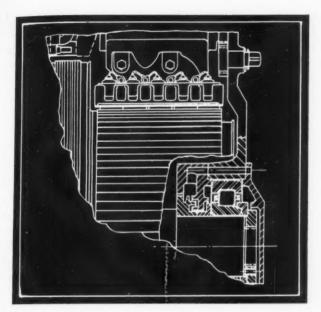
Cylindrical roller bearing application to 625horsepower motor of an electric locomotive
